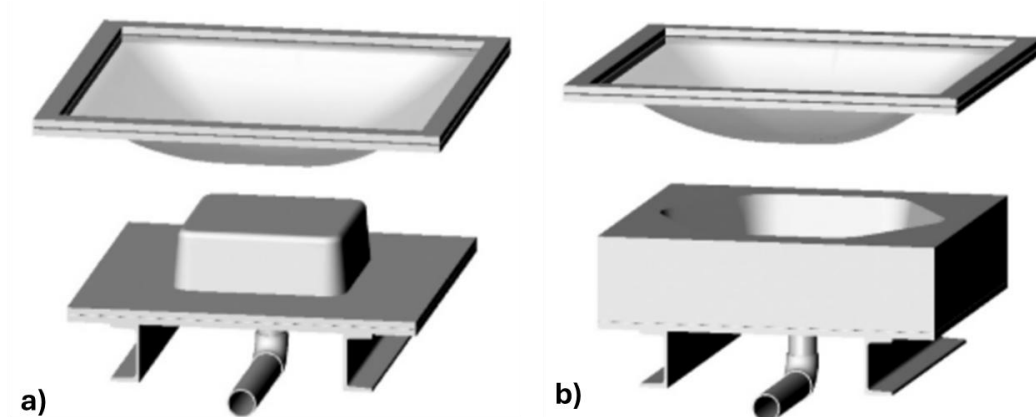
Typical thermoforming processes: a) Male mold drape and b) Female mold drape. [129]
